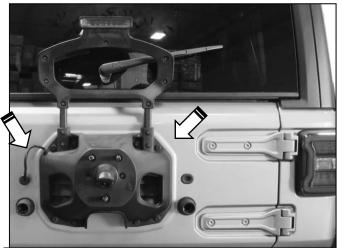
Remove the bolt attaching the check rod to the tailgate. Push check rod in, remove plastic covers from right side of cargo area and tailgate
